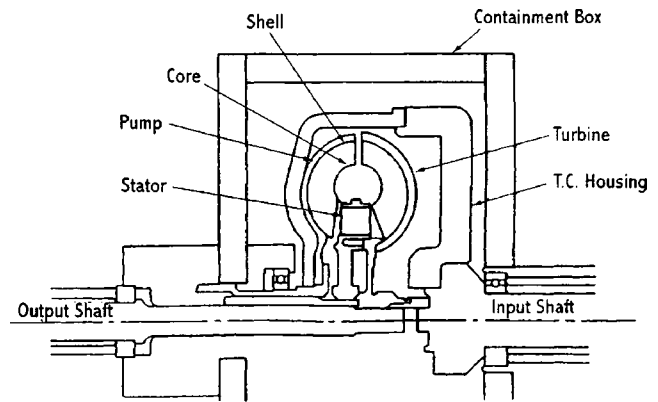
Cross-sectional view of torque converter showing containment box, components, and dimensions
